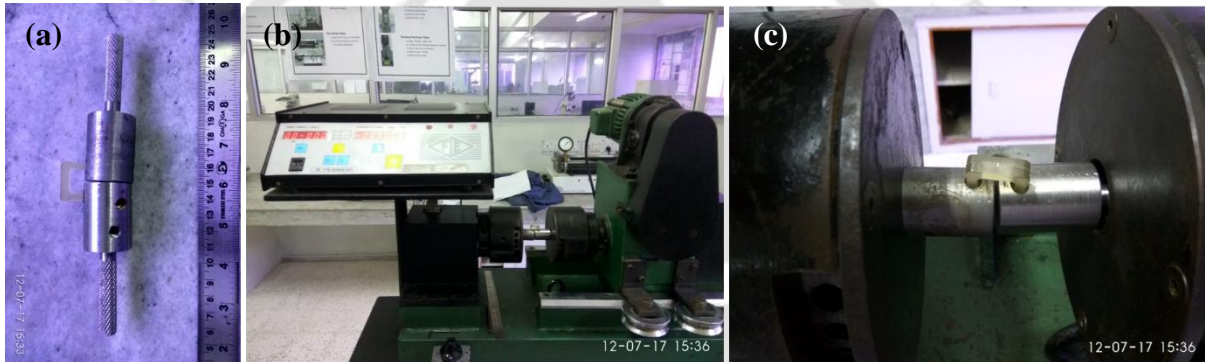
(a) Torsional test fixture for bone staples. (b) Torsion testing machine (c) Magnified photographic images of attached bone staples in the fabricated fixtures for torsion testing.
